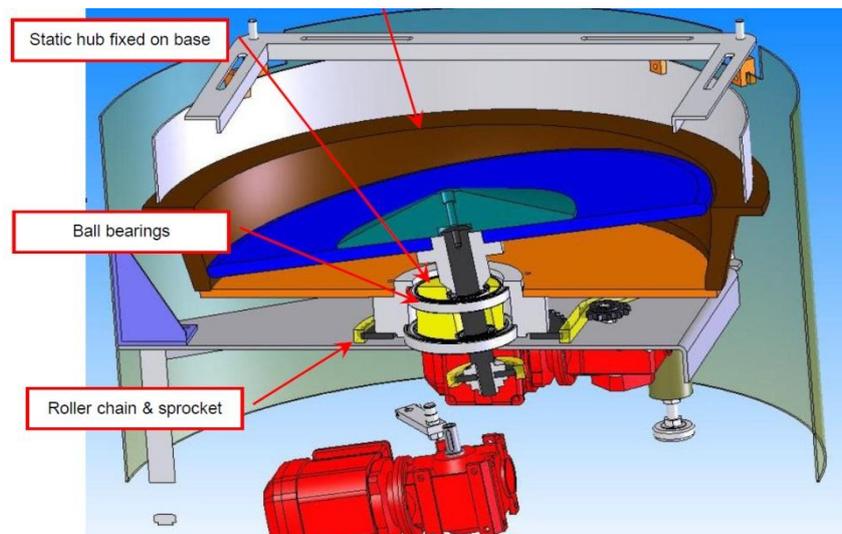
Disc Shaft Pass through the Fix Static Hub and Bowl Hub Mounted On Static Hub [2]
